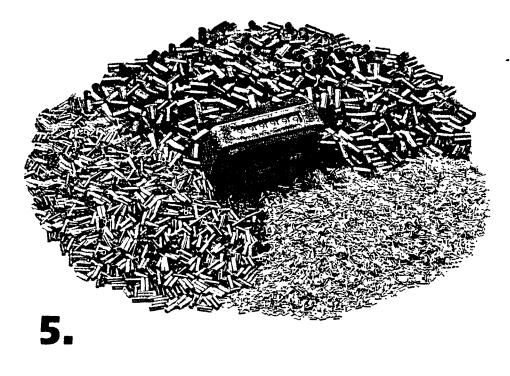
ELECTRONIC INDUSTRY PARTS Courtesy: G & J Steel and Tubing, Inc
